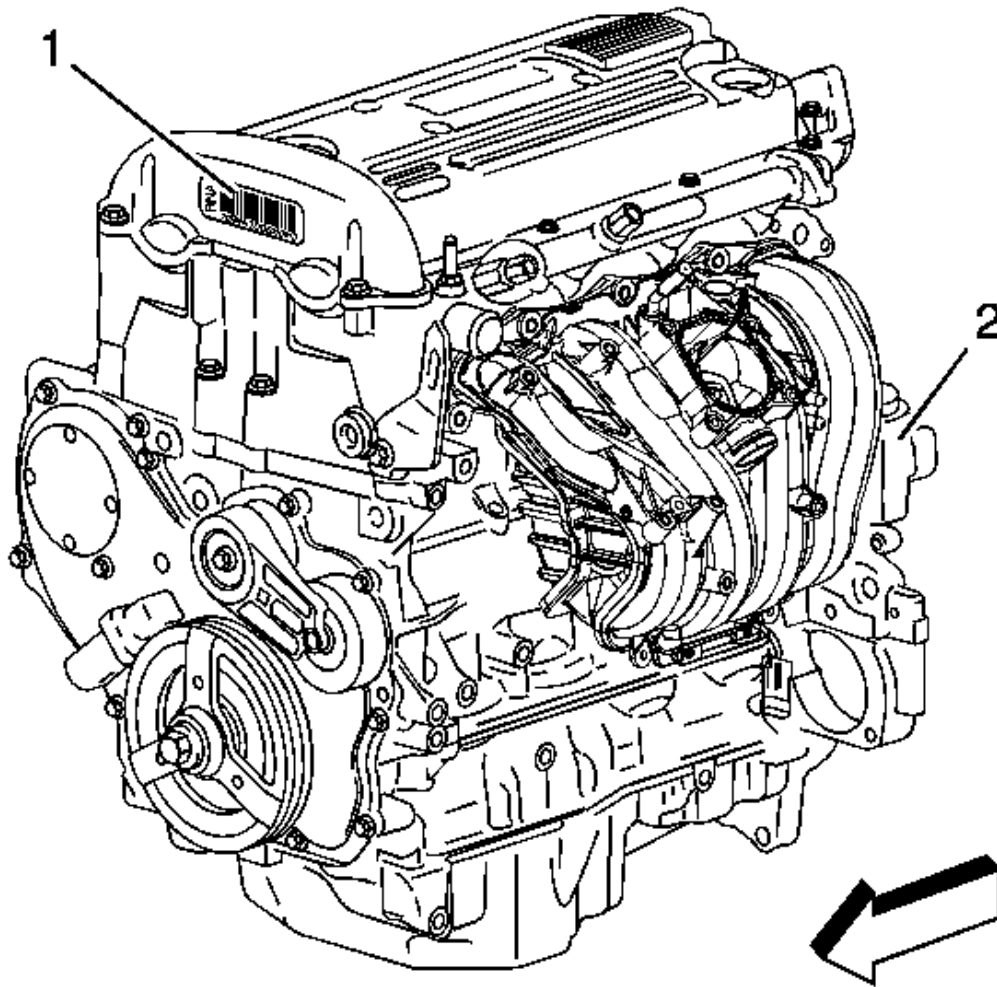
Identifying Broadcast Code Label & Partial VIN
